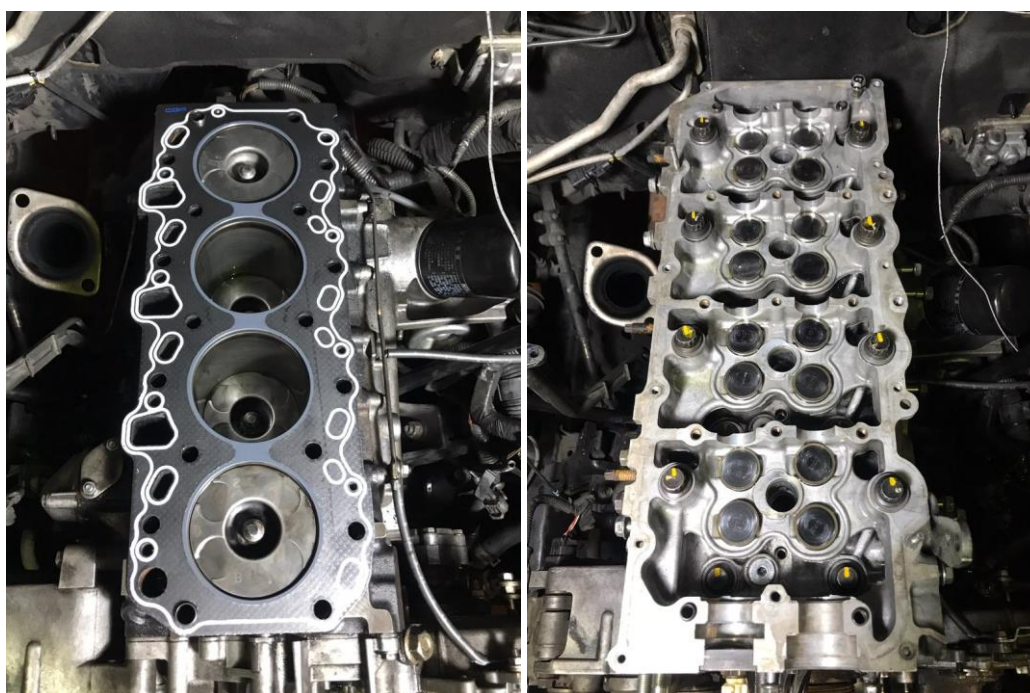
Engine head with a new gasket and new valve seal after top overhaul
